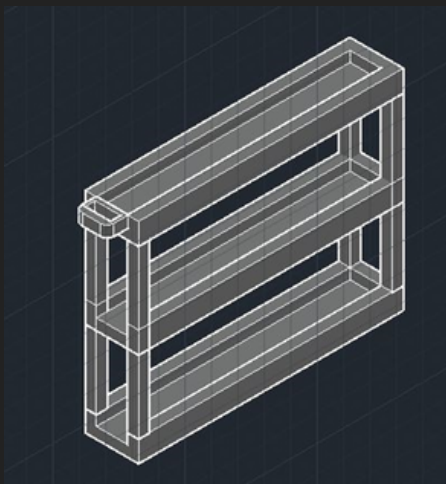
The 3D Dimensional design of Portable Rivet Lander Machine using AutoCAD 2022 Software
